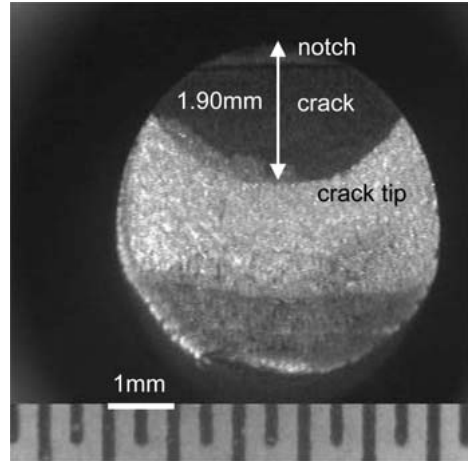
Photograph of the fatigue crack by heat tinting method.
